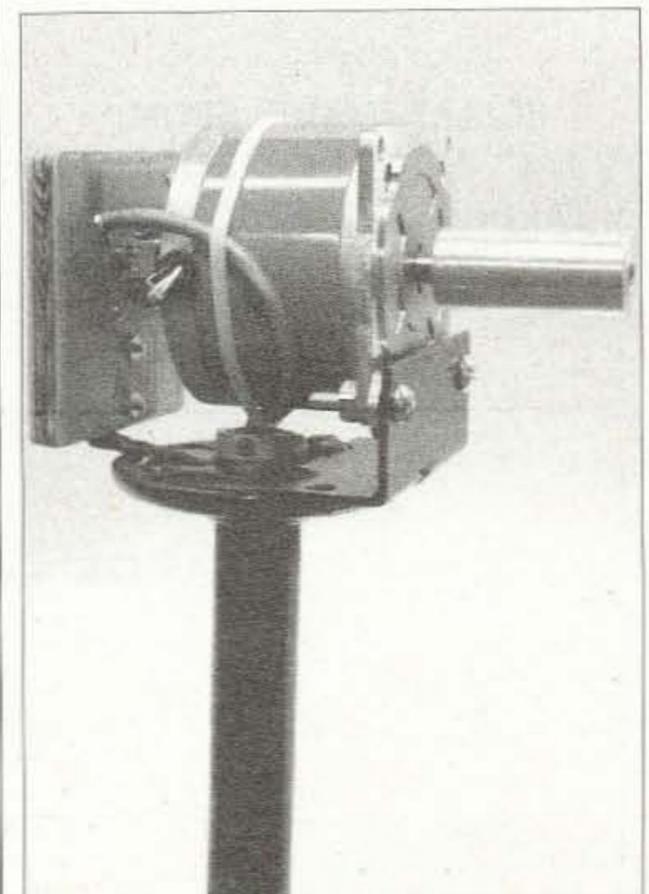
Photo D. Stepper motor and circuit board attached and wired. The cable passes down through the center of the mast.
